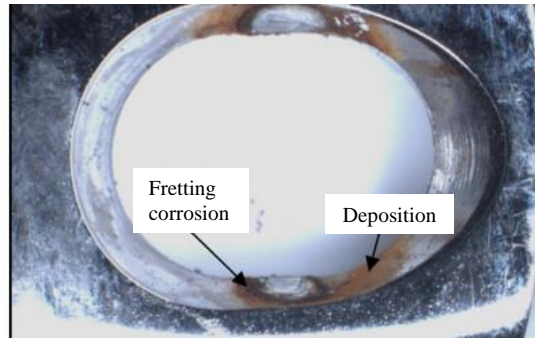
Fretting corrosion in the plate hole of a plate-screw connection.
